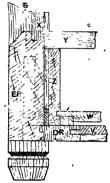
Section on Line K K (Fig. 122, p. 34) showing Foot of Front Standard, Rail, Framed Bottom, etc., seen from Back of Sideboard.
